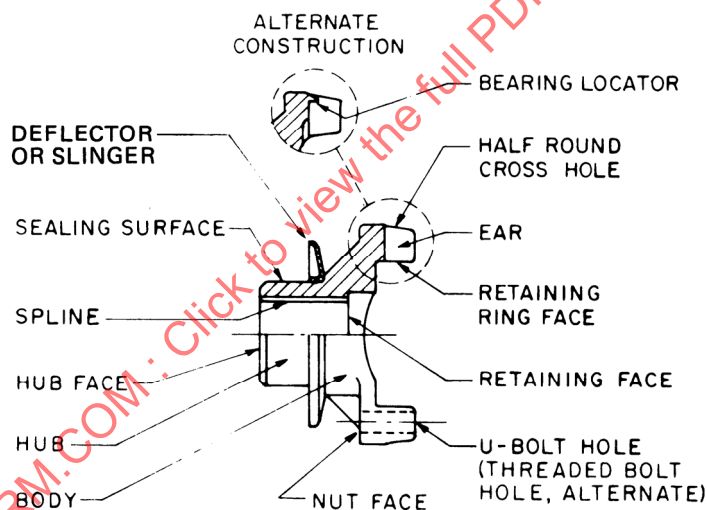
END YOKE (ROUND BEARING TYPE)
